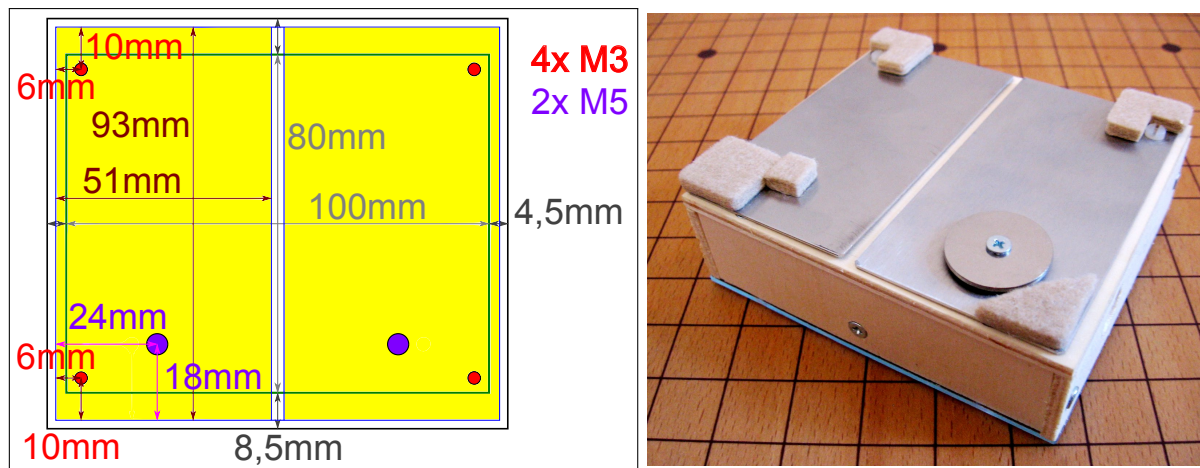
Stainless steel sheet metal electrodes at the bottom side of the housing, with a stainless steel washer for the reference (middle) voltage, dimensions and drill locations relative to the housing and photo of the actual prototype
